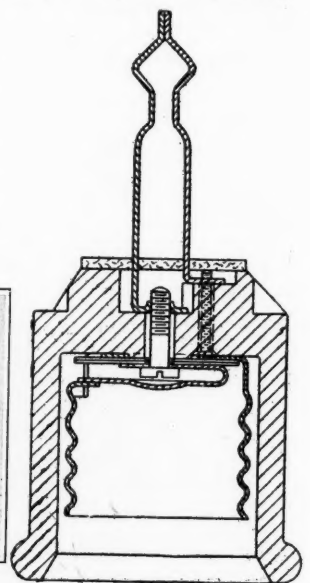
SECTIONAL VIEW OF PORCELAIN SERIES SOCKET WITH CUTOUT.
